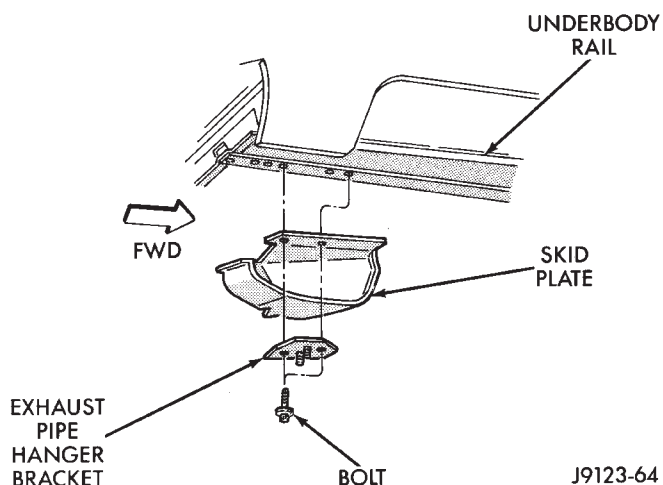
Fuel Tank Skid Plate W/O Trailer Hitch Or Tow Hook
